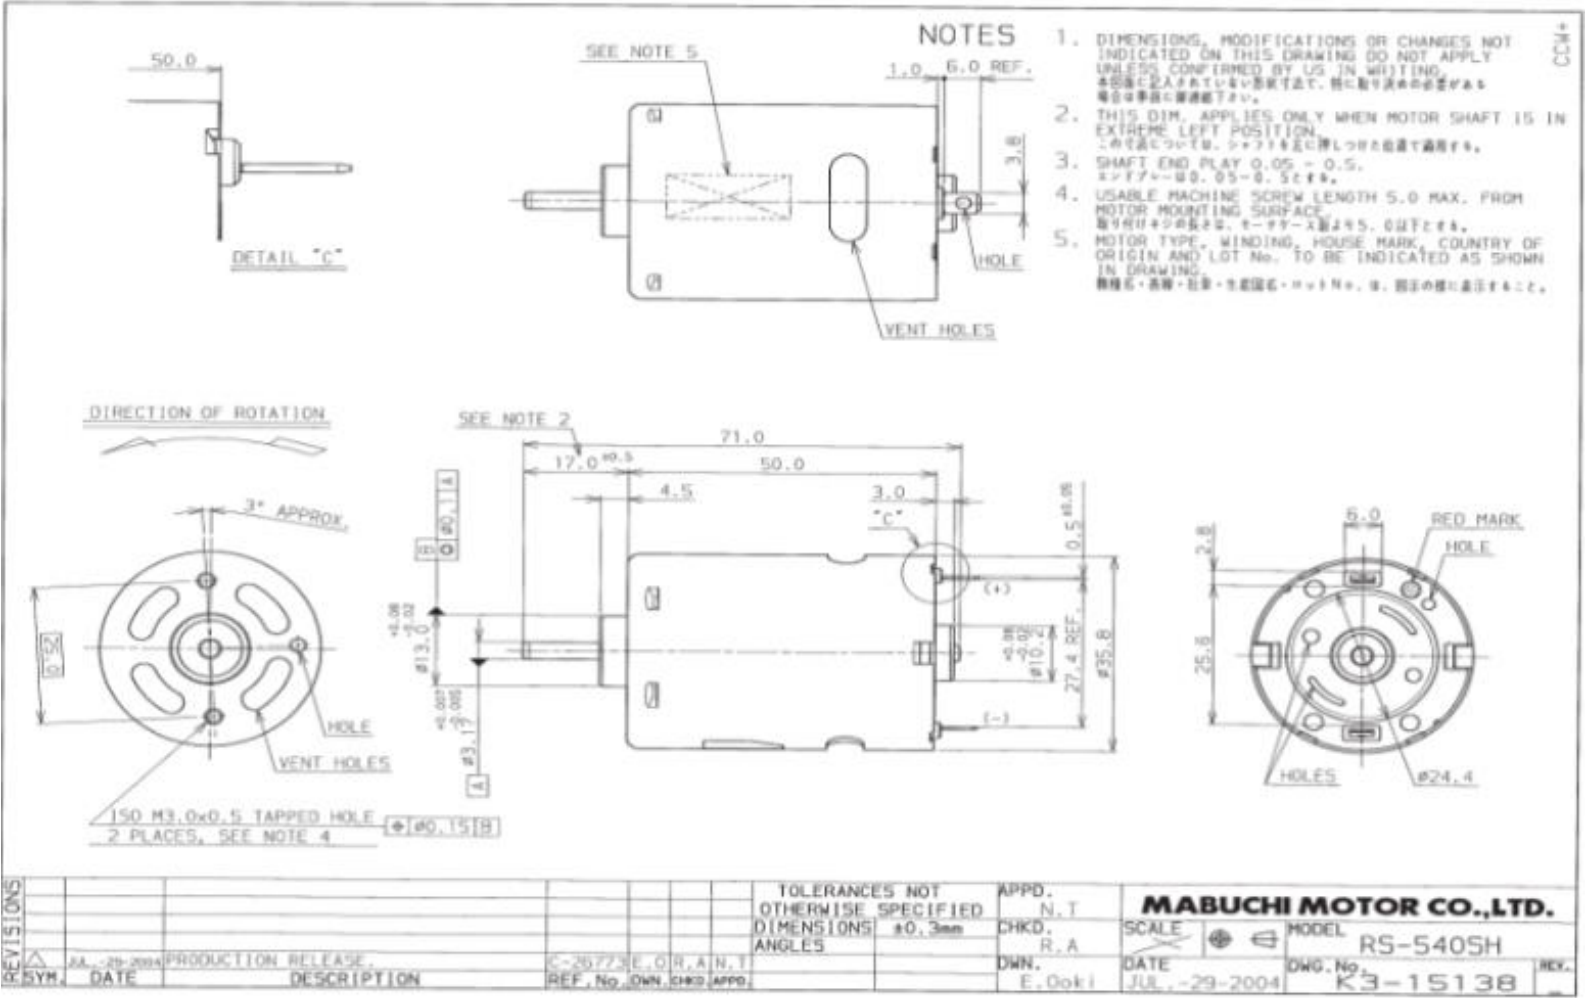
Mabuchi 520-6527 Brushed Motor drawing.
